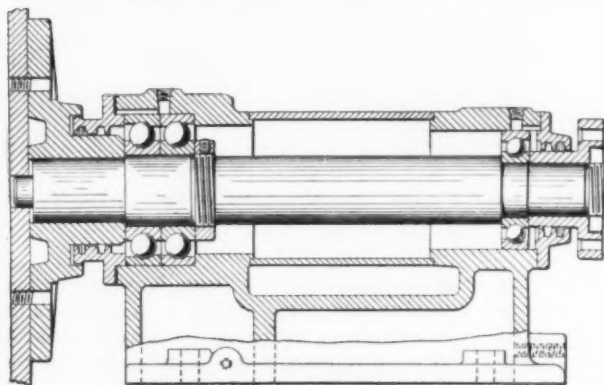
SPINDLE OF LARGE HORIZONTAL DISK GRINDER USING OPPOSED PAIRED ANGULAR-CONTACT BEARINGS, NON-ADJUSTABLE
